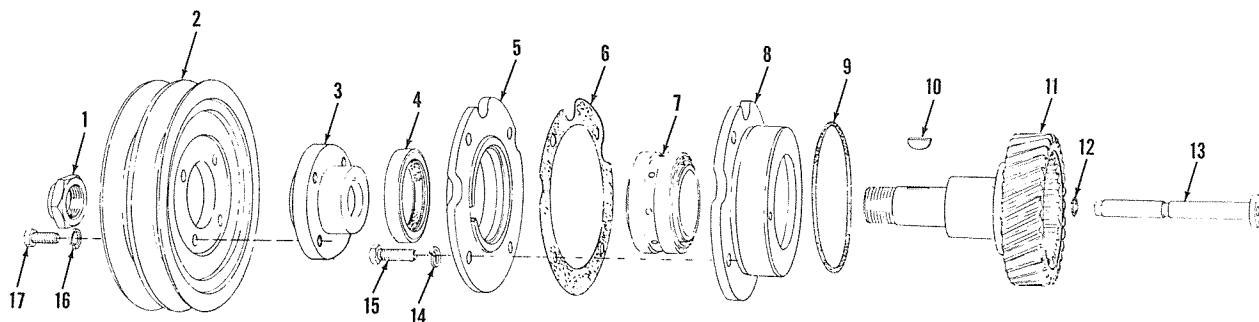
Fan Drive Details (Track-Type Tractor Engines
